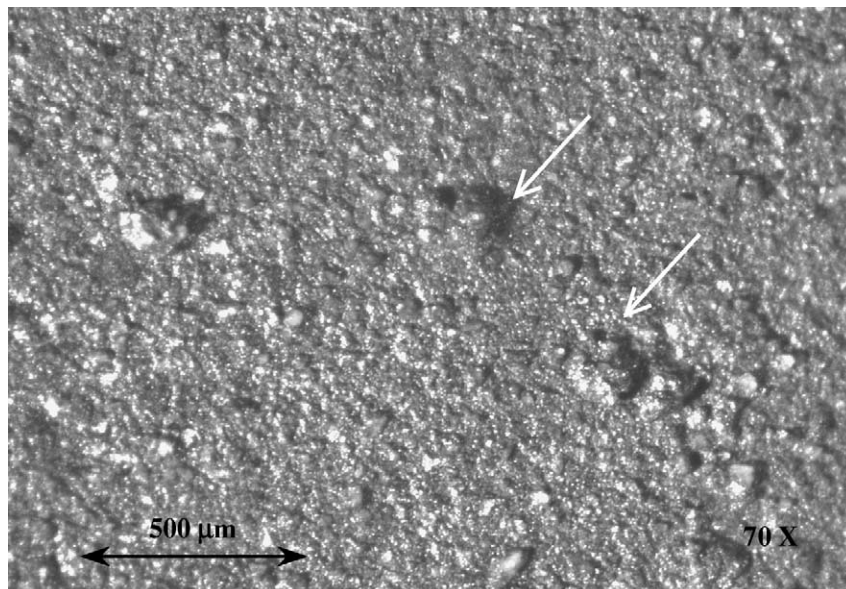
Surface of silver alloy cast into traditional mould (70 \times).
